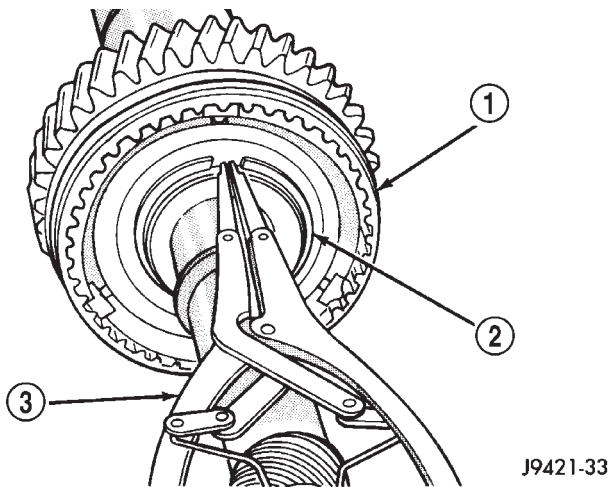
Fifth-Reverse Synchro Hub Snap Ring Removal
